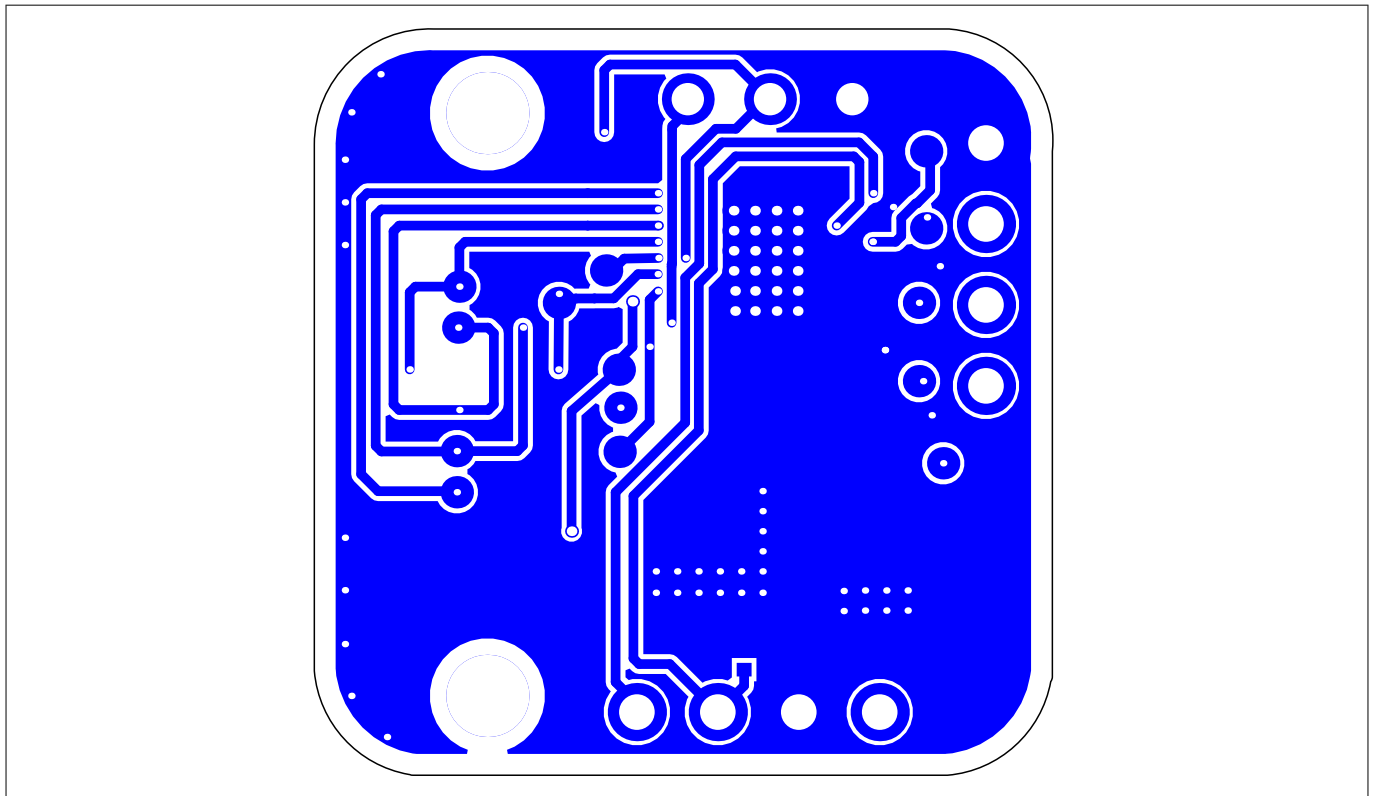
Layout of REF_Mini_Actuator_15W reference design - Bottom
